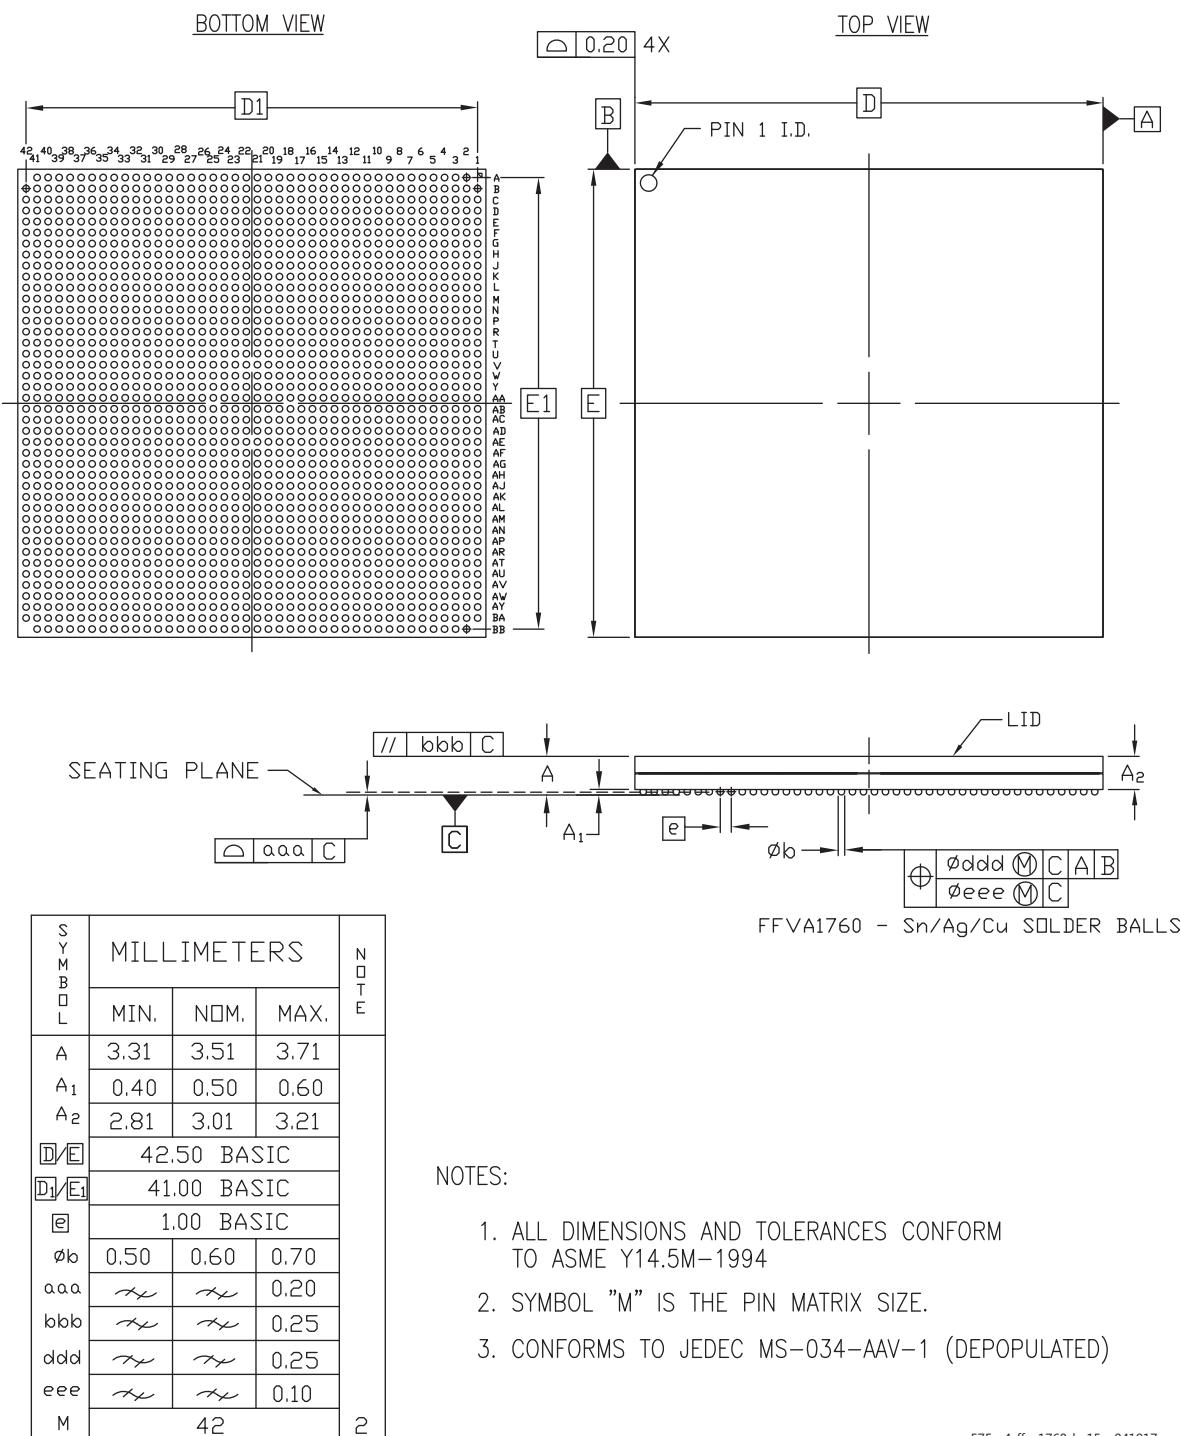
Package Dimensions for FFVA1760 (XCKU15P)
